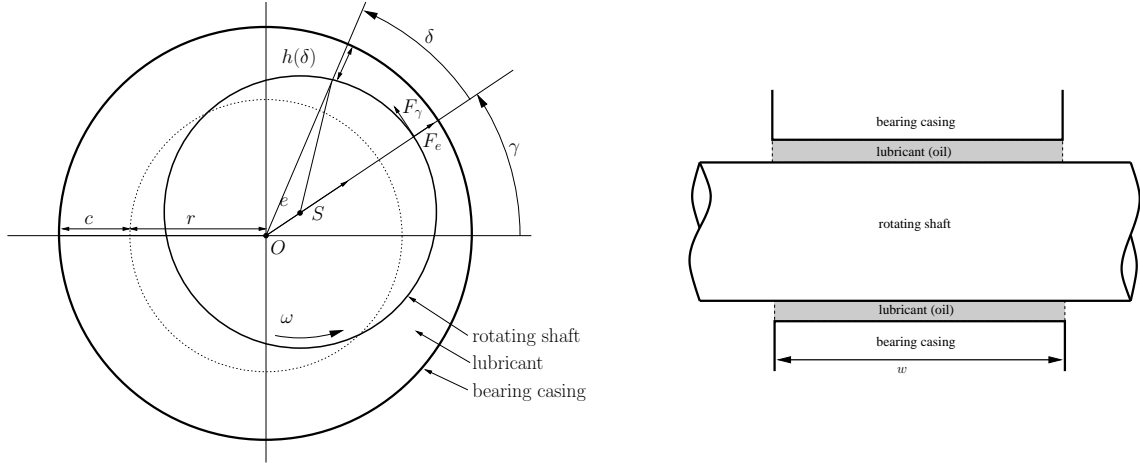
Sketch of journal bearing, cross-sectional (left) and lateral (right) view.
